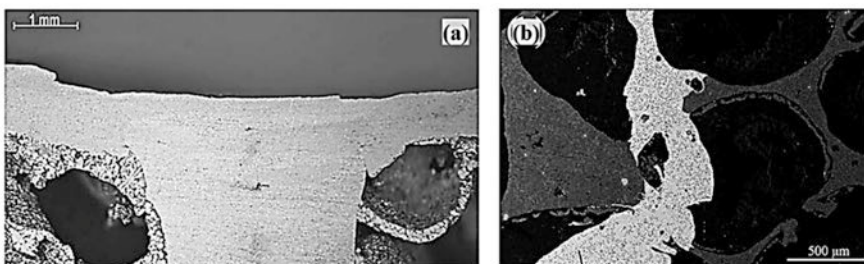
Some joint surface conditions after: (a) Friction stir welding of two AFSs (to obtain a butt weld) (by inserting an extruded aluminum profile) [85] and (b) surface self-abrasion fluxless soldering of two closed-cell aluminum foams [92]. Reprinted by permission from Elsevier
